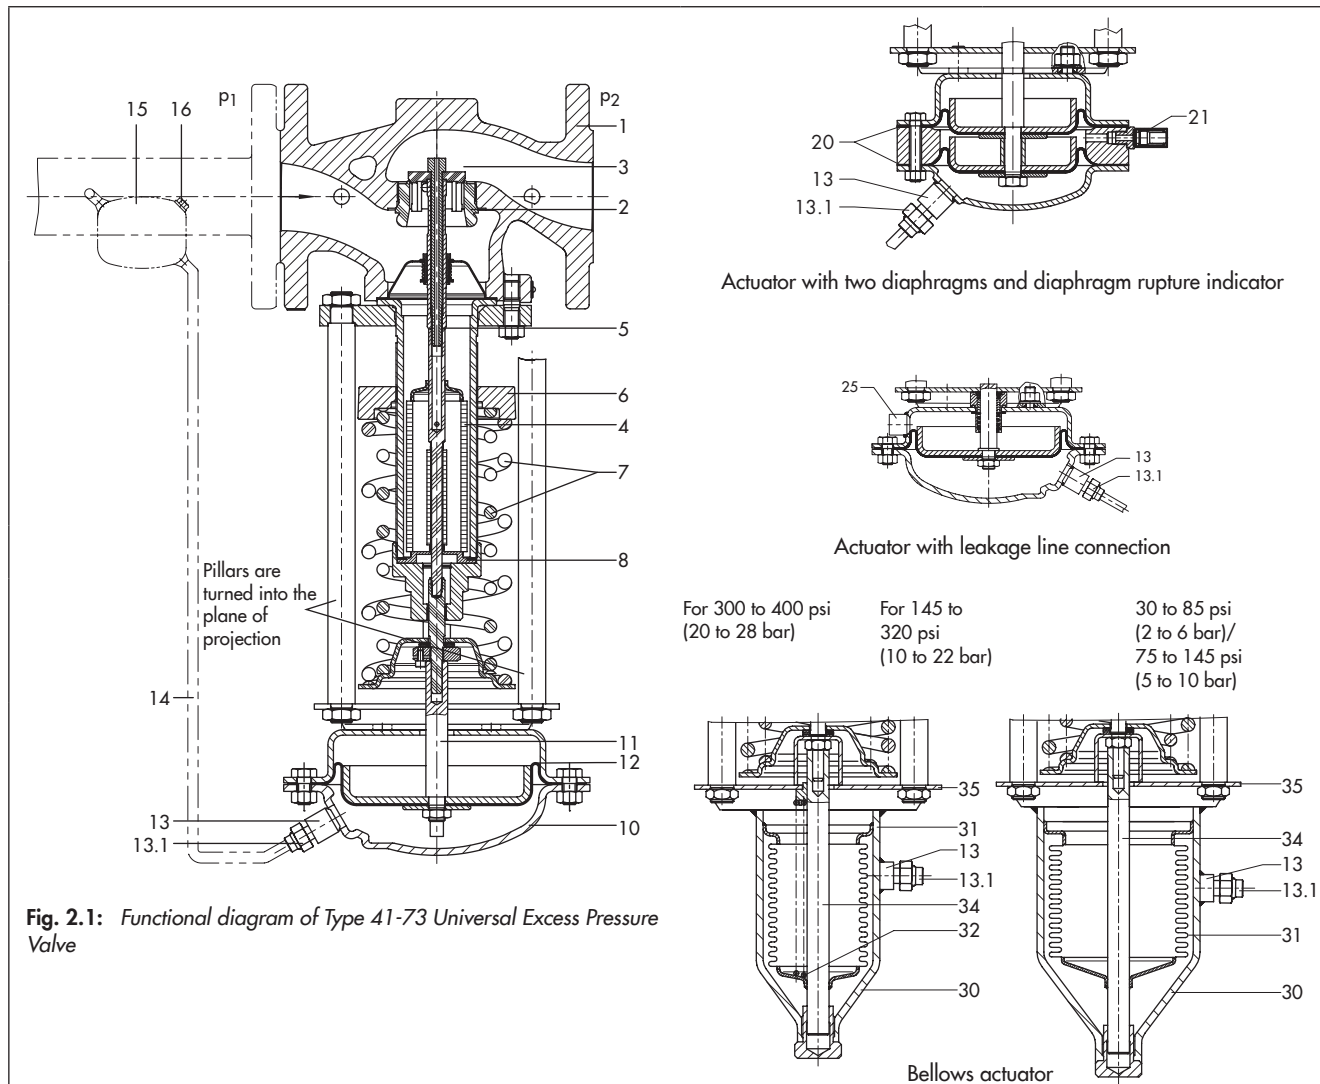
Functional diagram of Type 41-73 Universal Excess Pressure Valve
